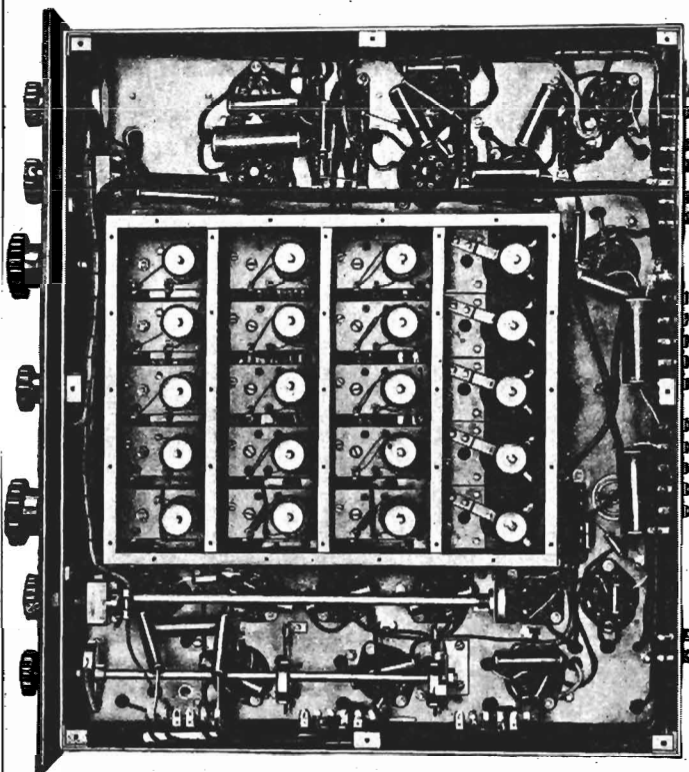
Bottom view of the "SP-200-X" receiver showing the coil assembly and general layout of parts.
